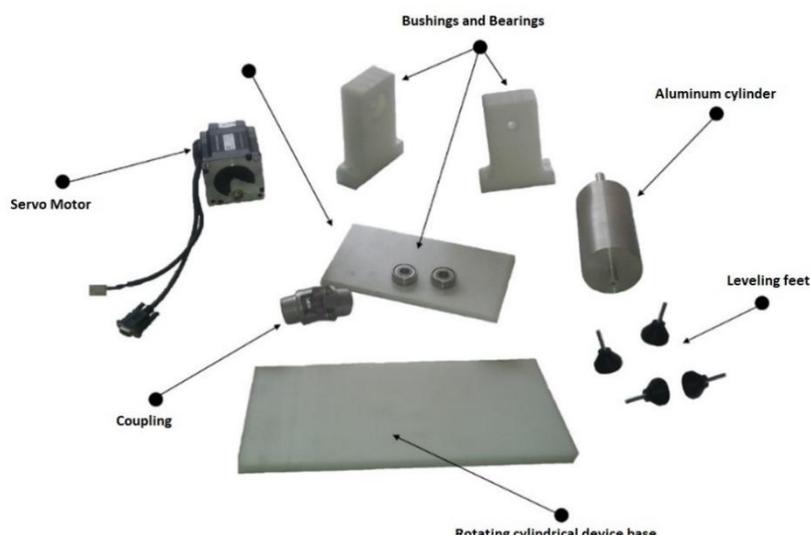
The main components of the rotating cylinder device used in the assembly.
